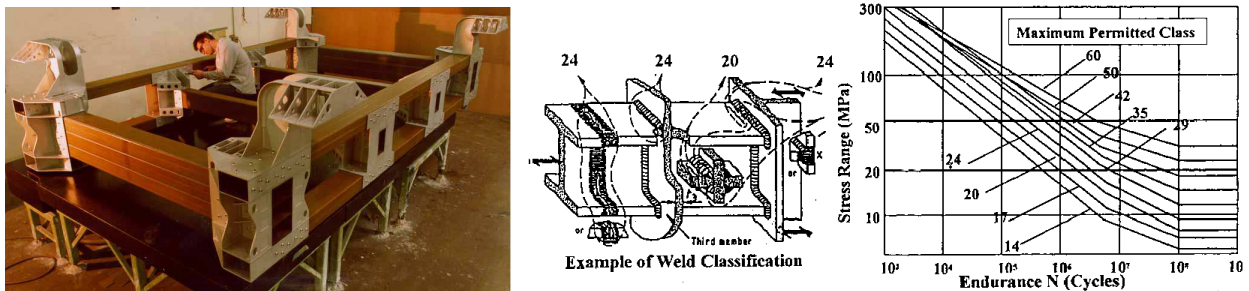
Truck frame made of rectangular FRP tubes and aluminium joint parts [8] (left),
